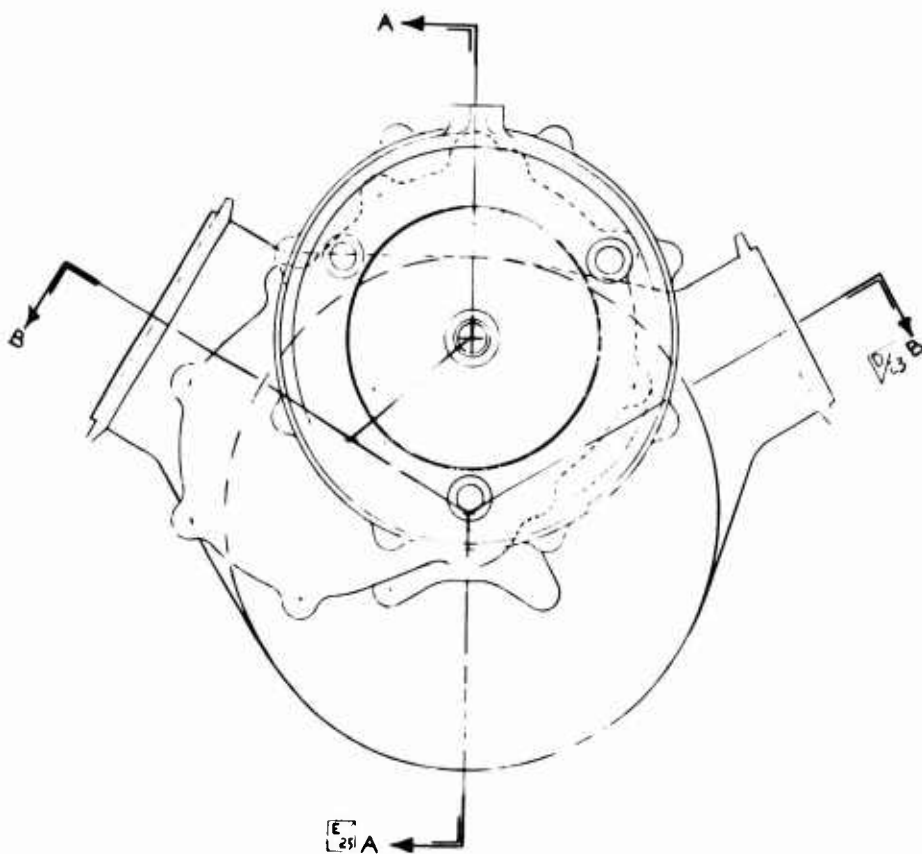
Arrangement of ATM, High-Speed Gearbox, and Brake.
